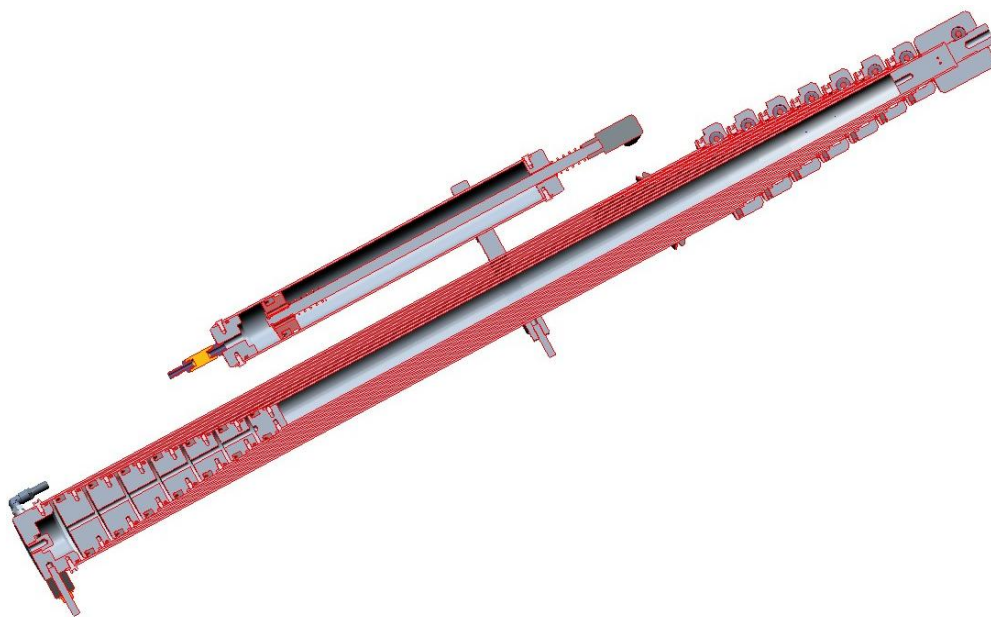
Tubular telescopic structure – Example of a mast with 8 sections
